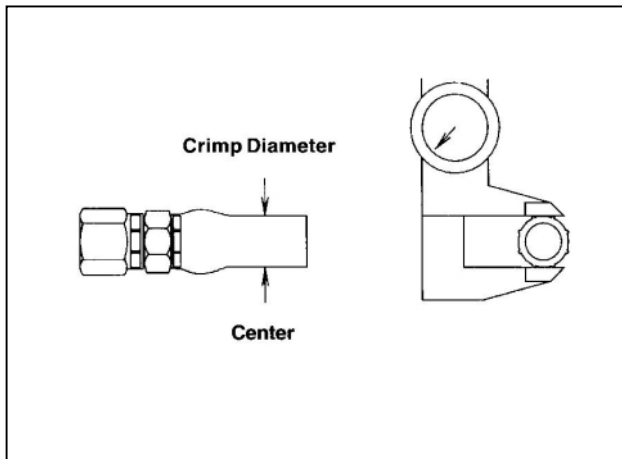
Fitting crimp diameter should be 0.893 inch at most. The crimp diameter is measured in the center of the crimping area
